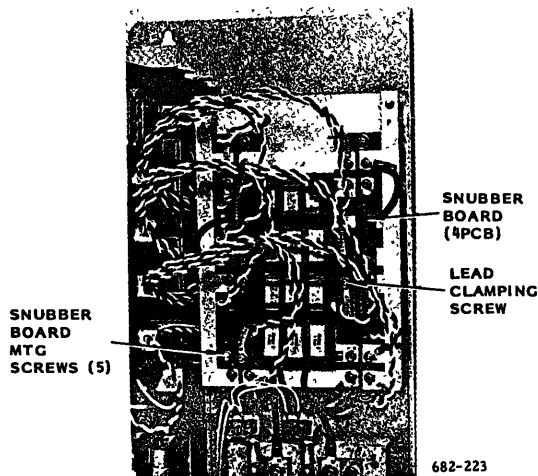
Field Thyristor Assembly (230 V, 25 A)
